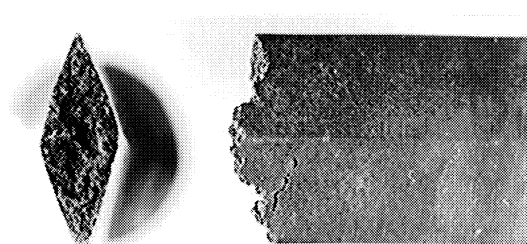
Diamond-Shaped Specimen of Type 304 Stainless Steel, Fractured during Overheating in Thermal-Shock Test. Axial load was caused by lower electrode and grip.
